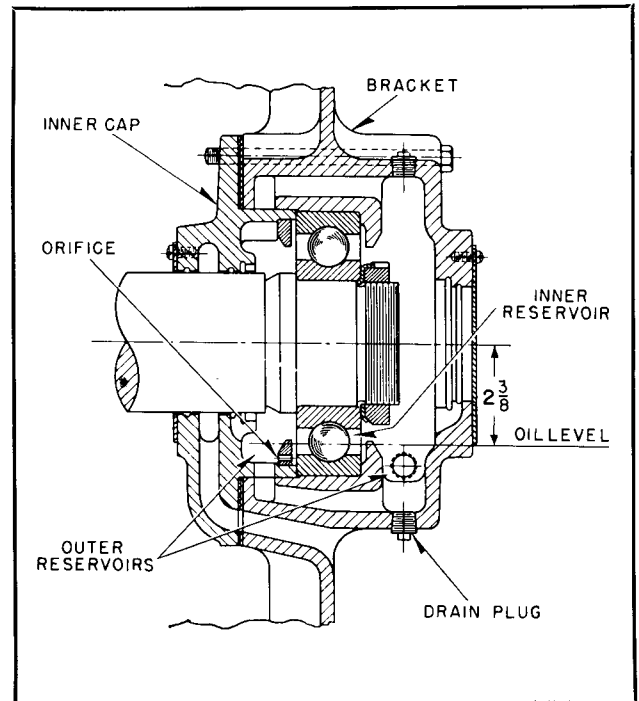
Typical Ball Bearing (Oil Lubricated)
